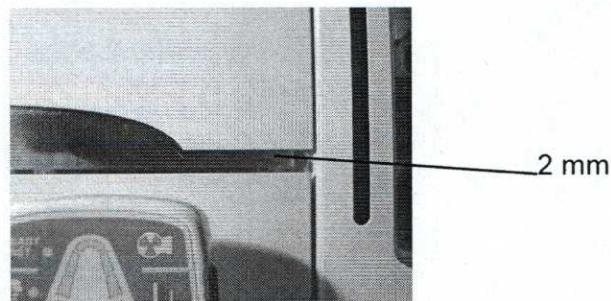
Carriage side covers (left and right) should leave 2 mm gap after closing the screws
